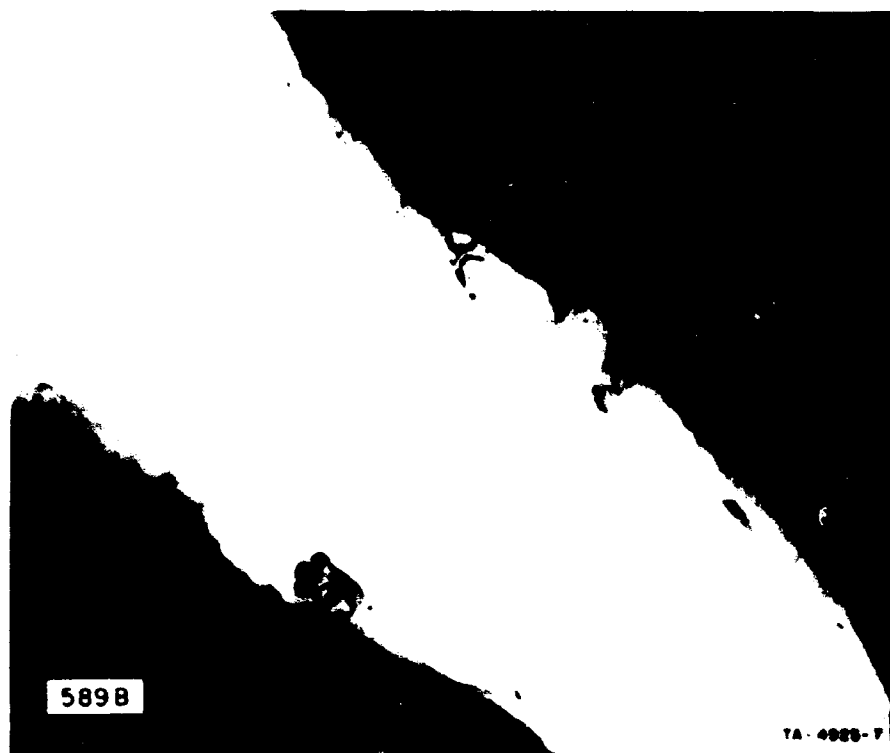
SHEAR TYPE OF FRACTURE EXHIBITING "SERRATED" EDGE. Photo of unwetted aluminum specimen pulled in tension under identical conditions. Mag. 5,000 X
